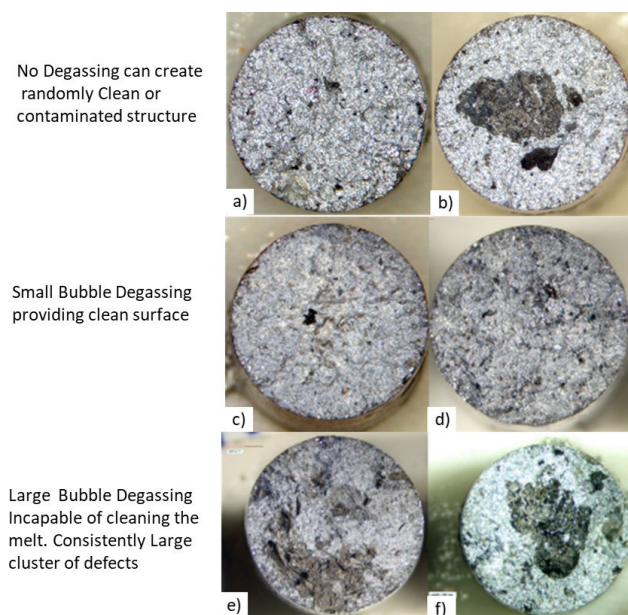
Cross sections of tensile test specimen: a-b) No-degassed, c-d) Small bubble degassing - tilt pouring SBD-TP, e-f) Large bubble degassing - tilt pouring LBD-TP
